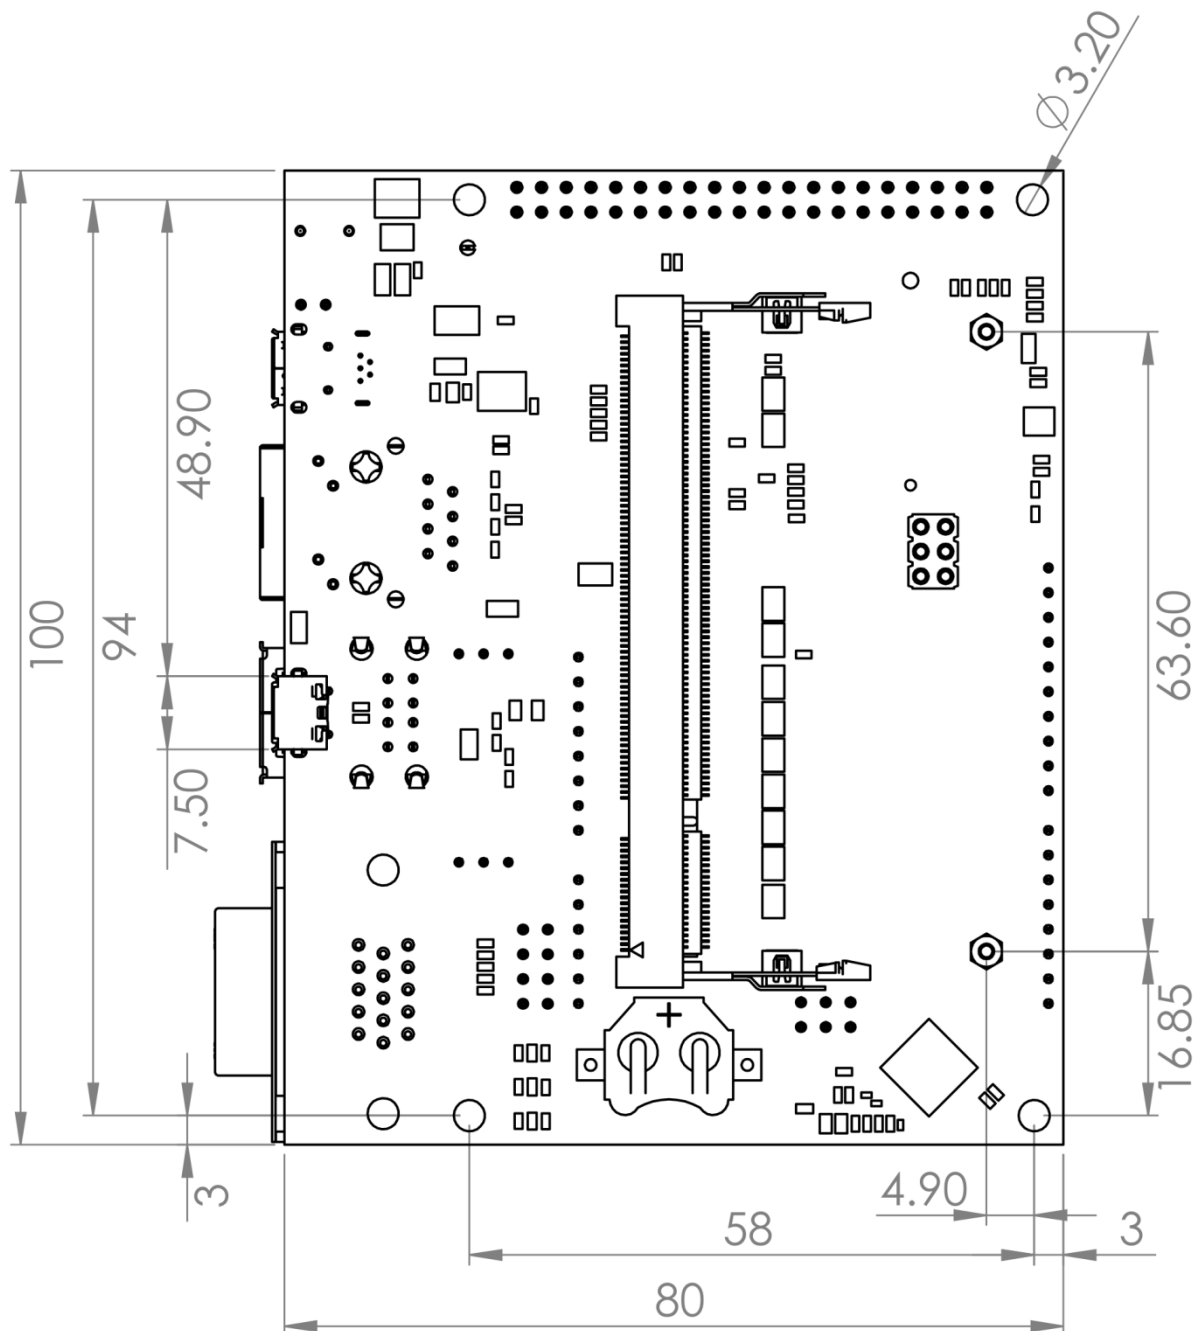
Dimensions – Bottom Side, all dimensions are in millimetres (mm)
